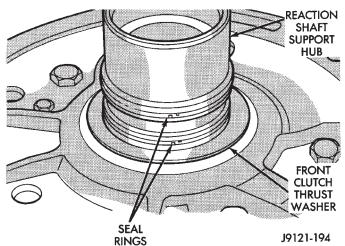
Reaction Shaft Support Seal Rings And Front Clutch Thrust Washer
